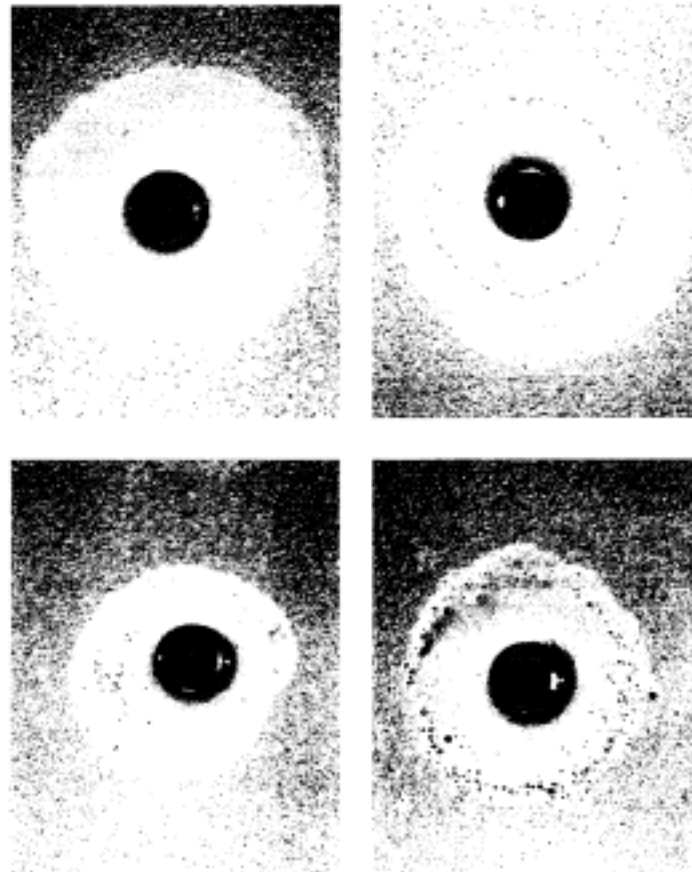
Solder ball formation during solder ball test for determining the suitability of solder paste. No solder ball (top left) is preferred, but a minor occurrence of very fine solder balls (top right) is also acceptable. Clustered solder balls (bottom left) and a solder ball halo ring with numerous solder balls (bottom right) are unacceptable [1].
